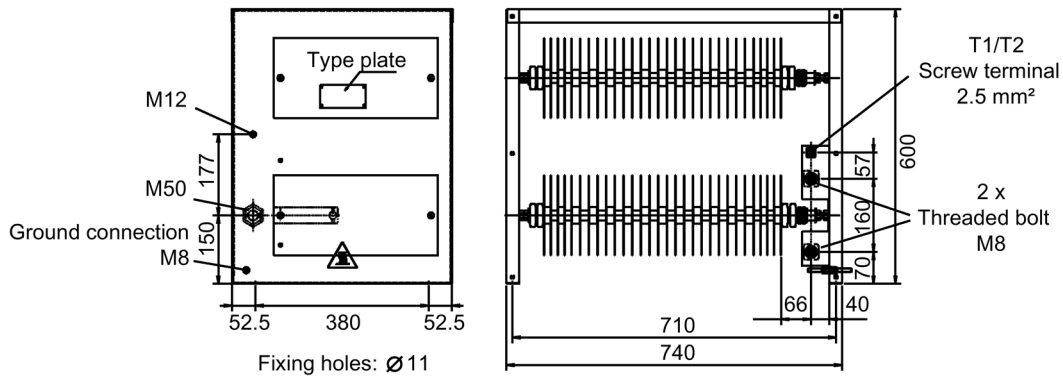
Dimension drawing for braking resistor (25 kW)
